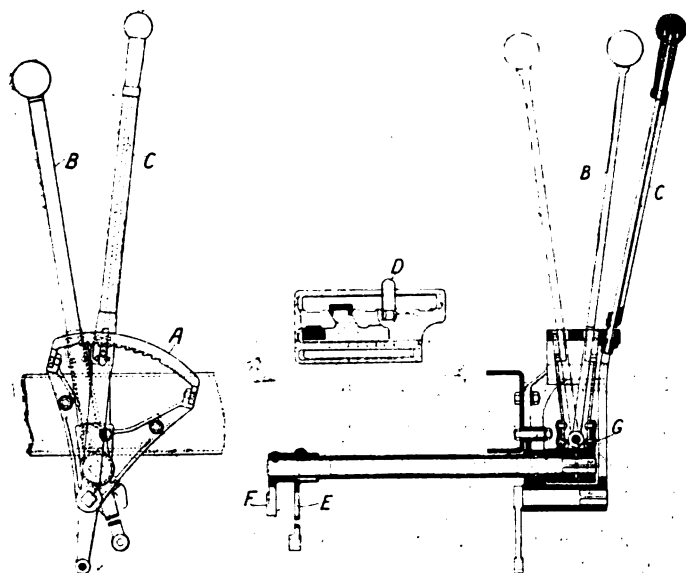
Details of Change Speed Gear and Hand Brake Control.
